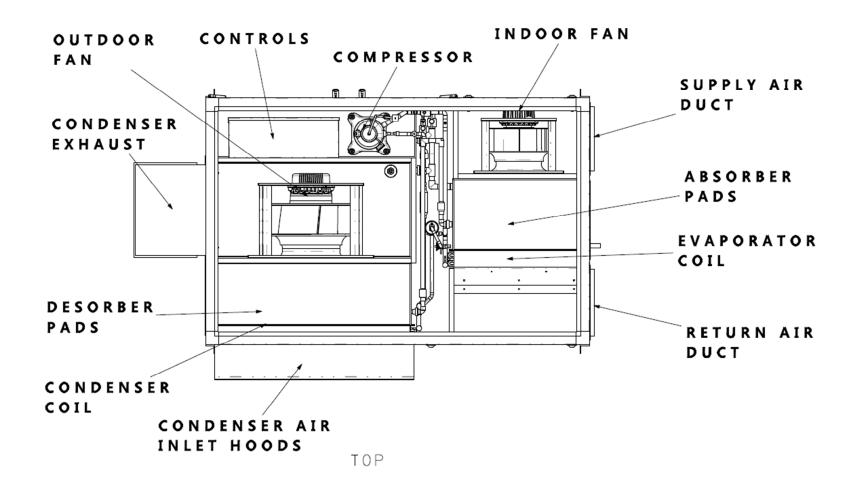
Engineering Drawing of the LDDX-Ad Prototype
